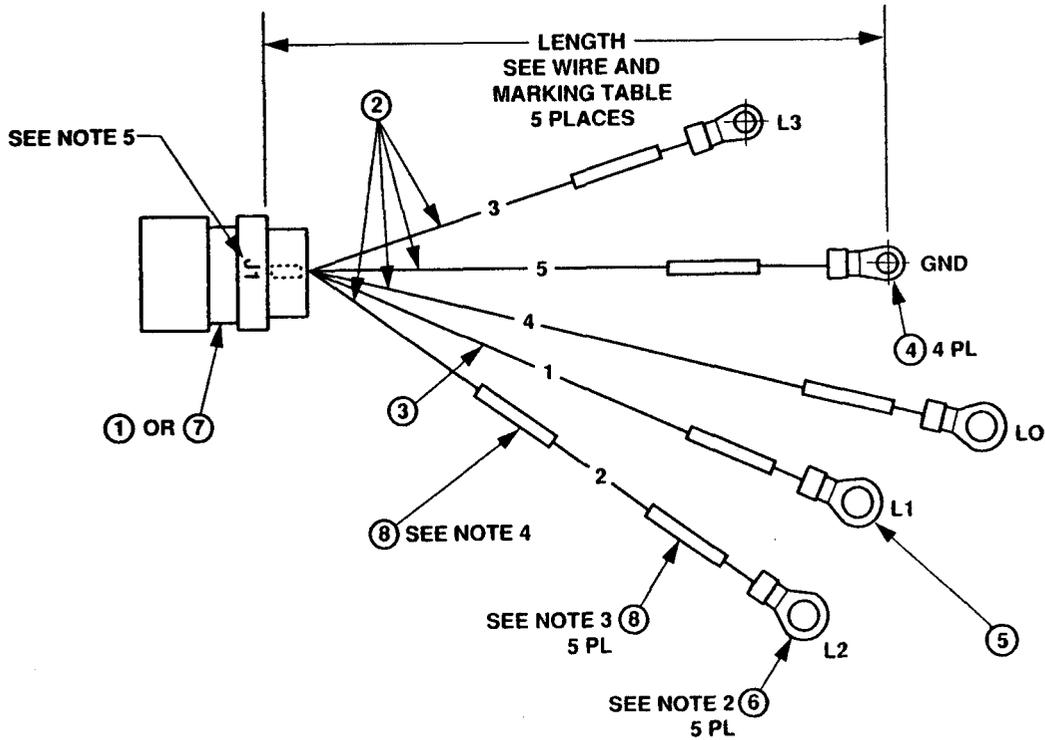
Swith Box harness Assembly W9 (Sheet 3).
